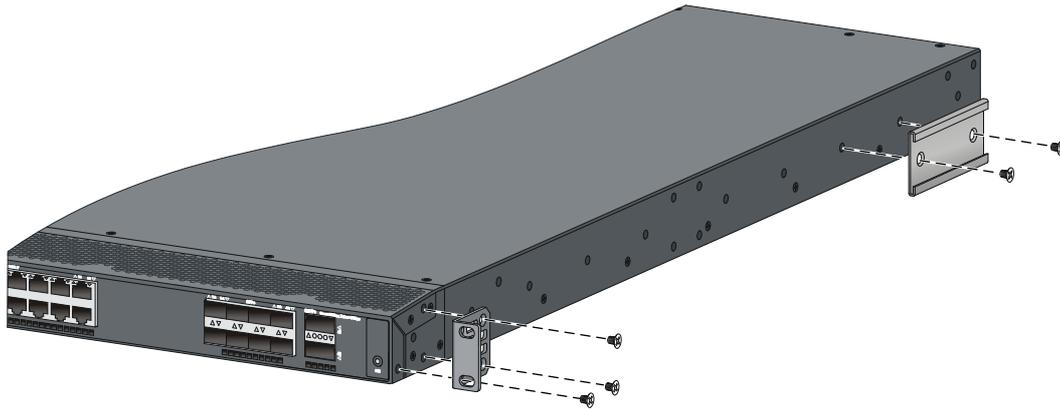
Attaching the front mounting brackets/chassis rails to the chassis
